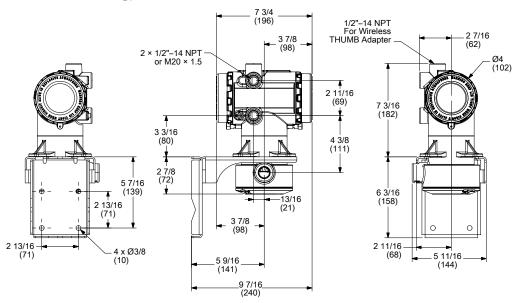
4-wire and 9-wire remote mount transmitter dimensions (stainless steel housing)
